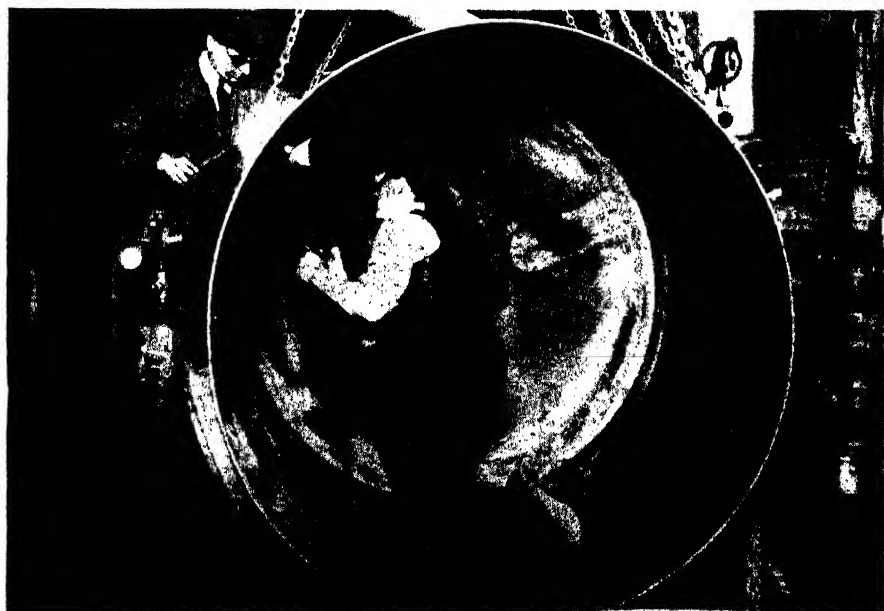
WELDING A LARGE COPPER VESSEL BY THE TWO-OPERATOR METHOD
